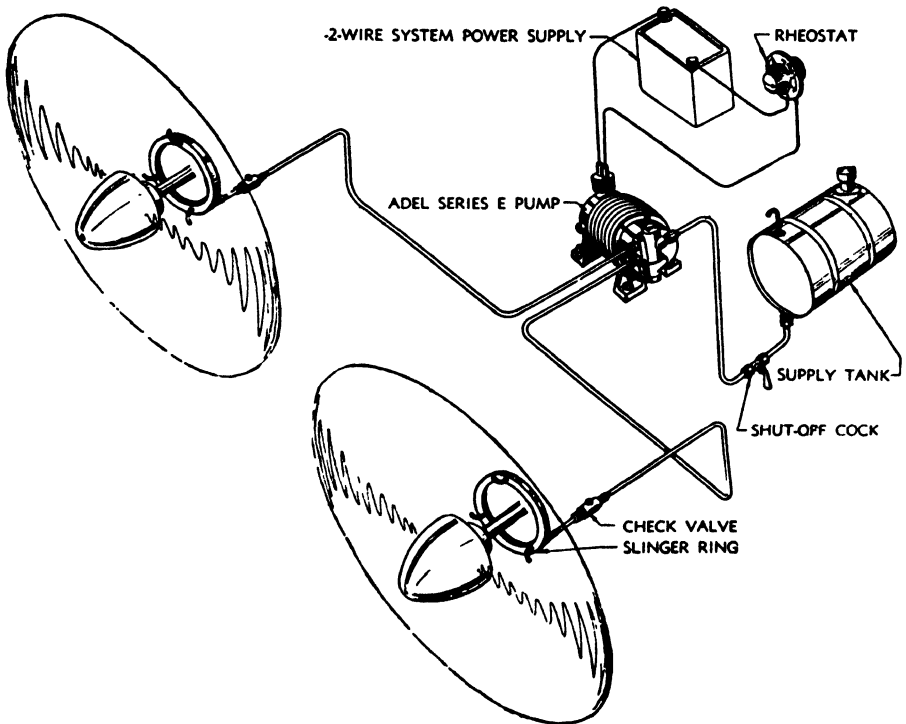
·9 Space drawing. (Adel Precision Products Corporation.)
